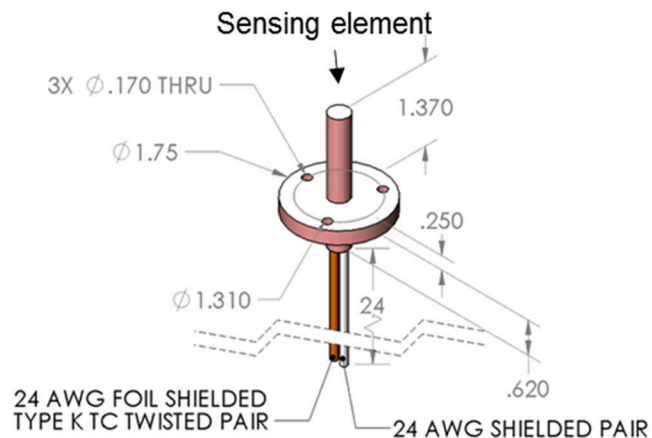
Heatflux Sensor / Radiometer body style. Dimensions are in inches.
